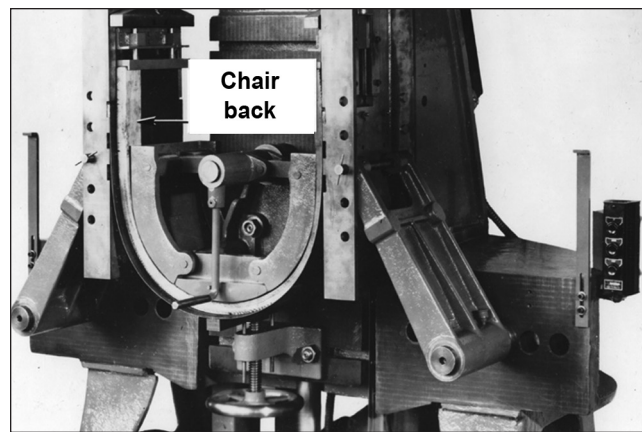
Chair back being bent through an arc of 180° in a bending machine.
